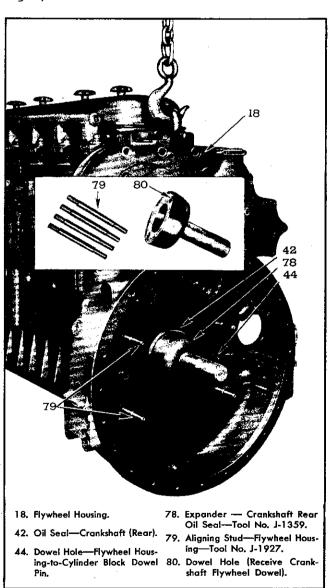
Installing Flywheel Housing, Using Tools J-1359 and J-1927, to Expand Oil Seal and Pilot Housing to Position, Respectively.
